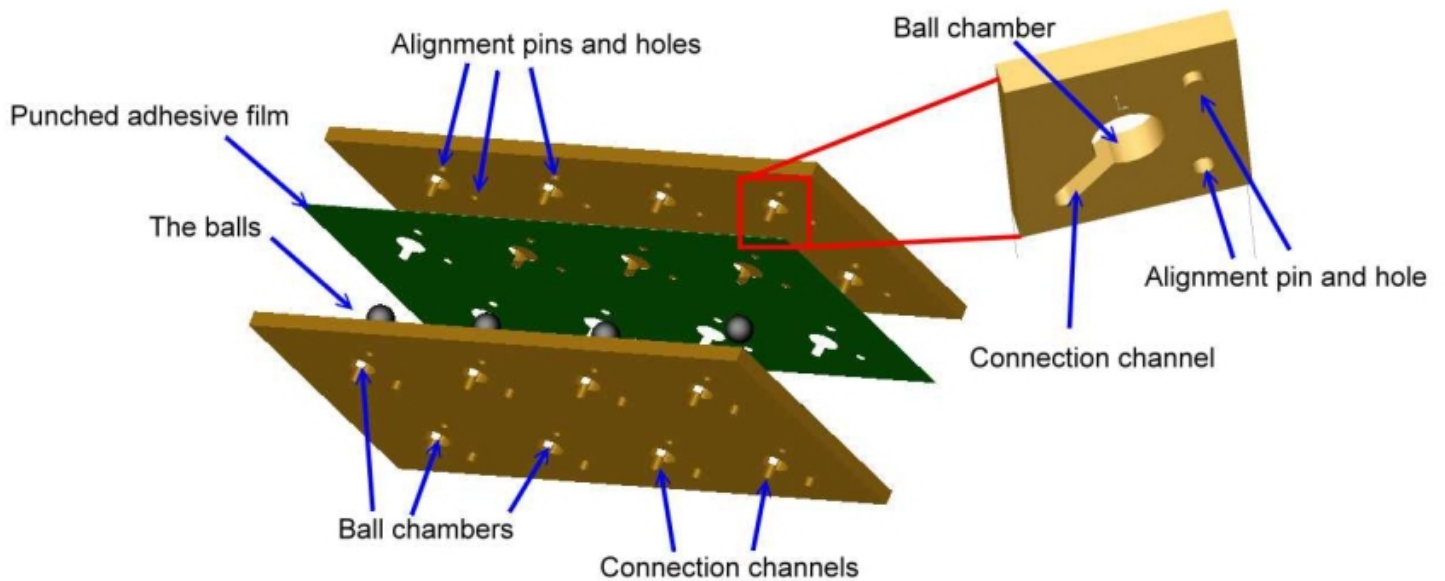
The ball chamber layers. The picture shows iron balls and a punched adhesive film in between. The thickness was set to be 1.60 mm each. The layer contained ball chambers, connection channels and alignment pins and holes.
